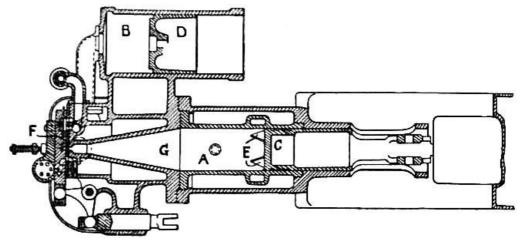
Sectional Plan of Clerk Cycle Engine, 1881.
